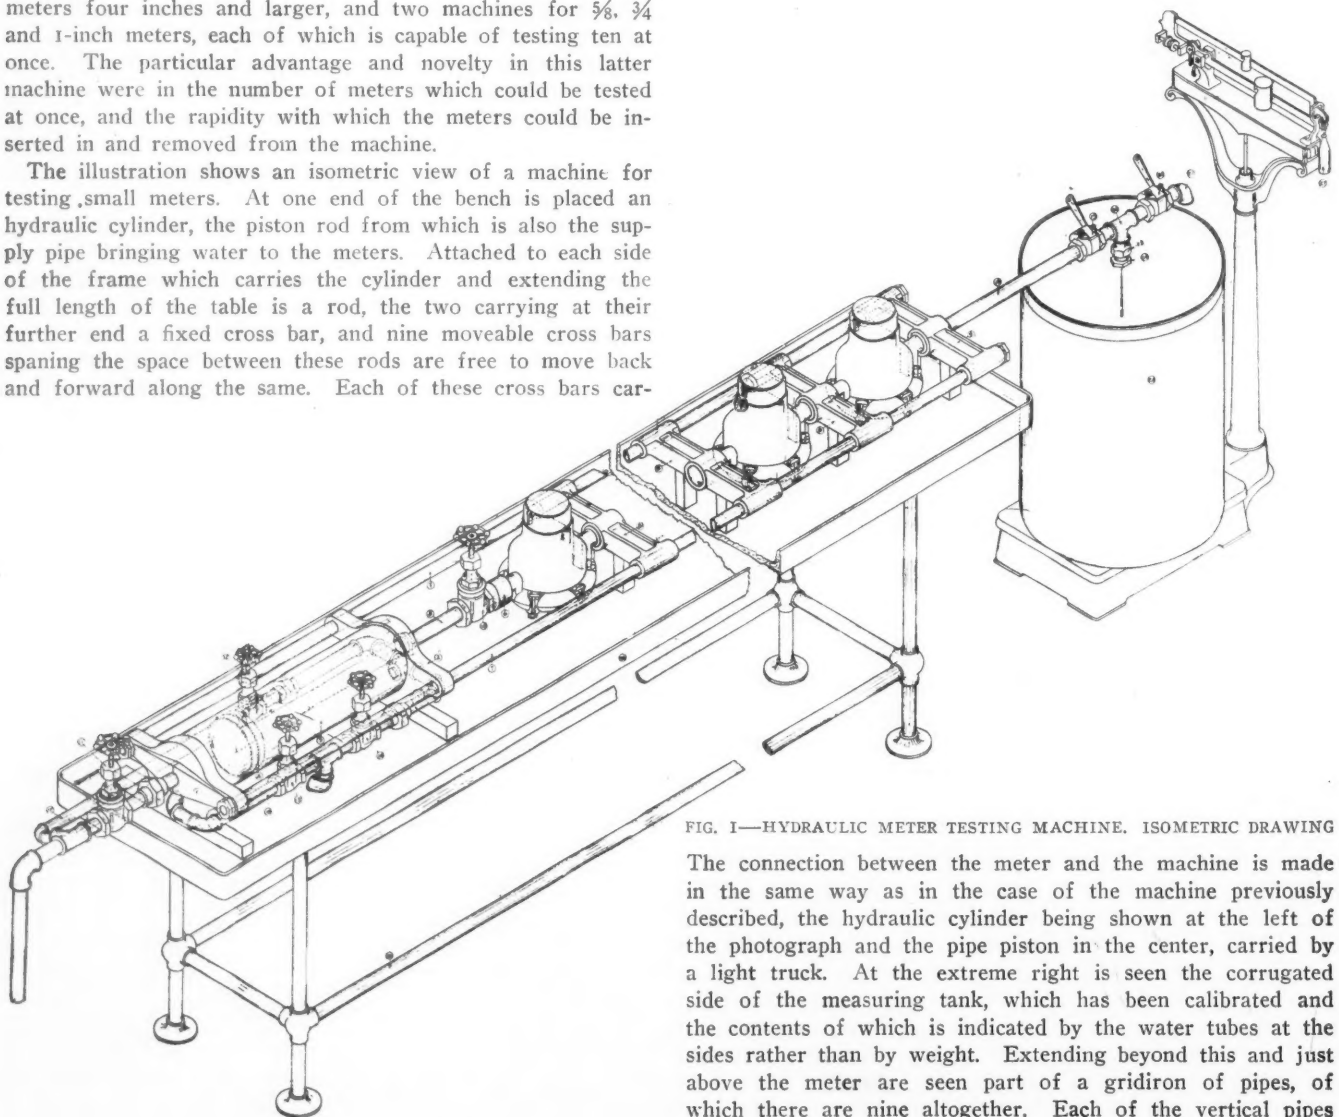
HYDRAULIC METER TESTING MACHINE. ISOMETRIC DRAWING
